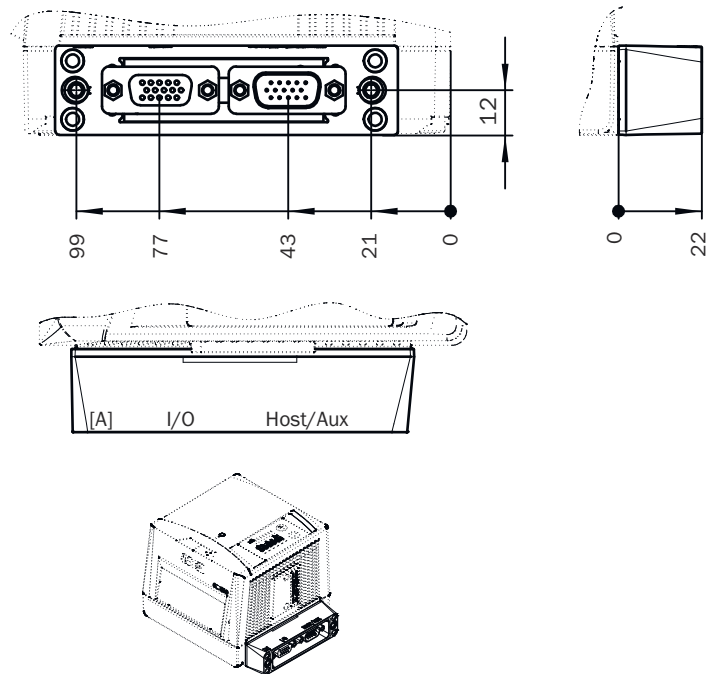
Dimensions of cloning plug A (D-Sub), all dimensions in mm
